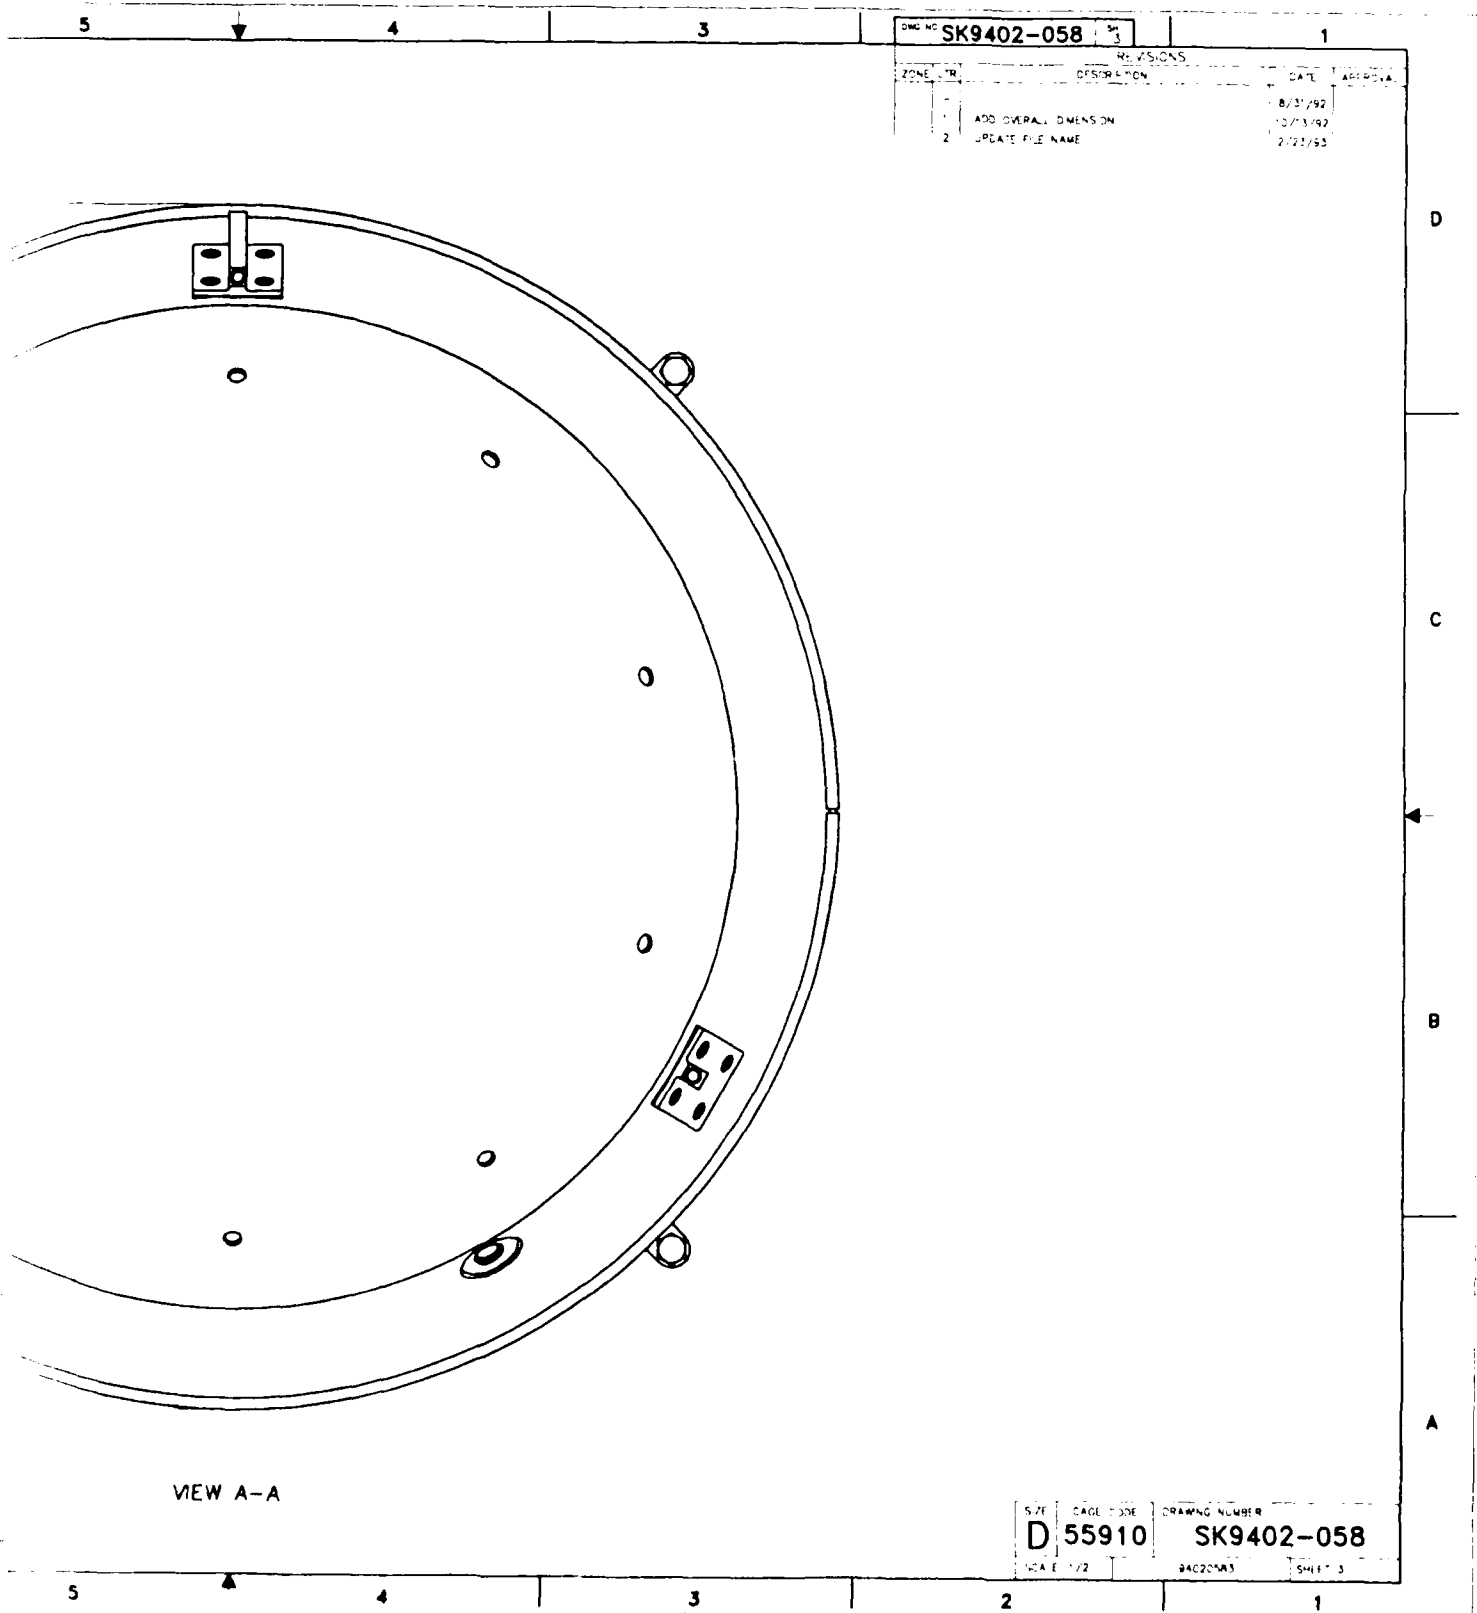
33-inch housing assembly drawing, Sheet 3.
